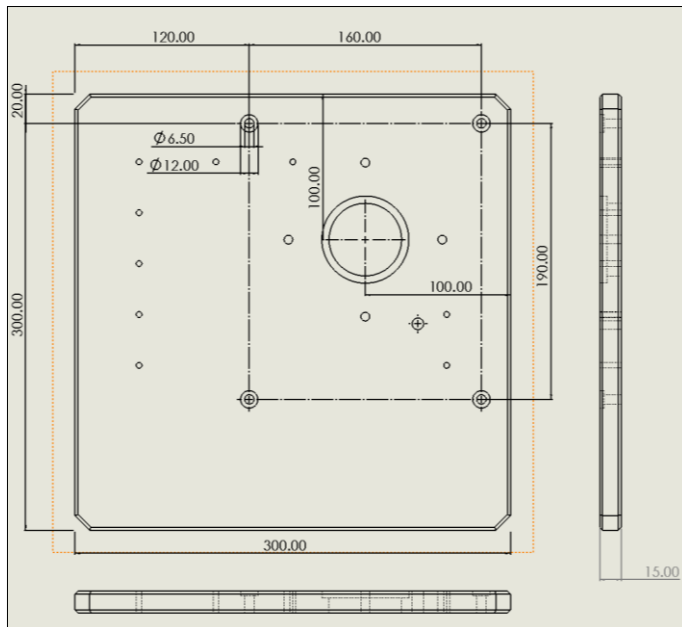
Dimensioned Schematic of Robot Base Plate for Manufacturing. Includes mounting holes for casing, Motor 1 Mount, and Installation.
